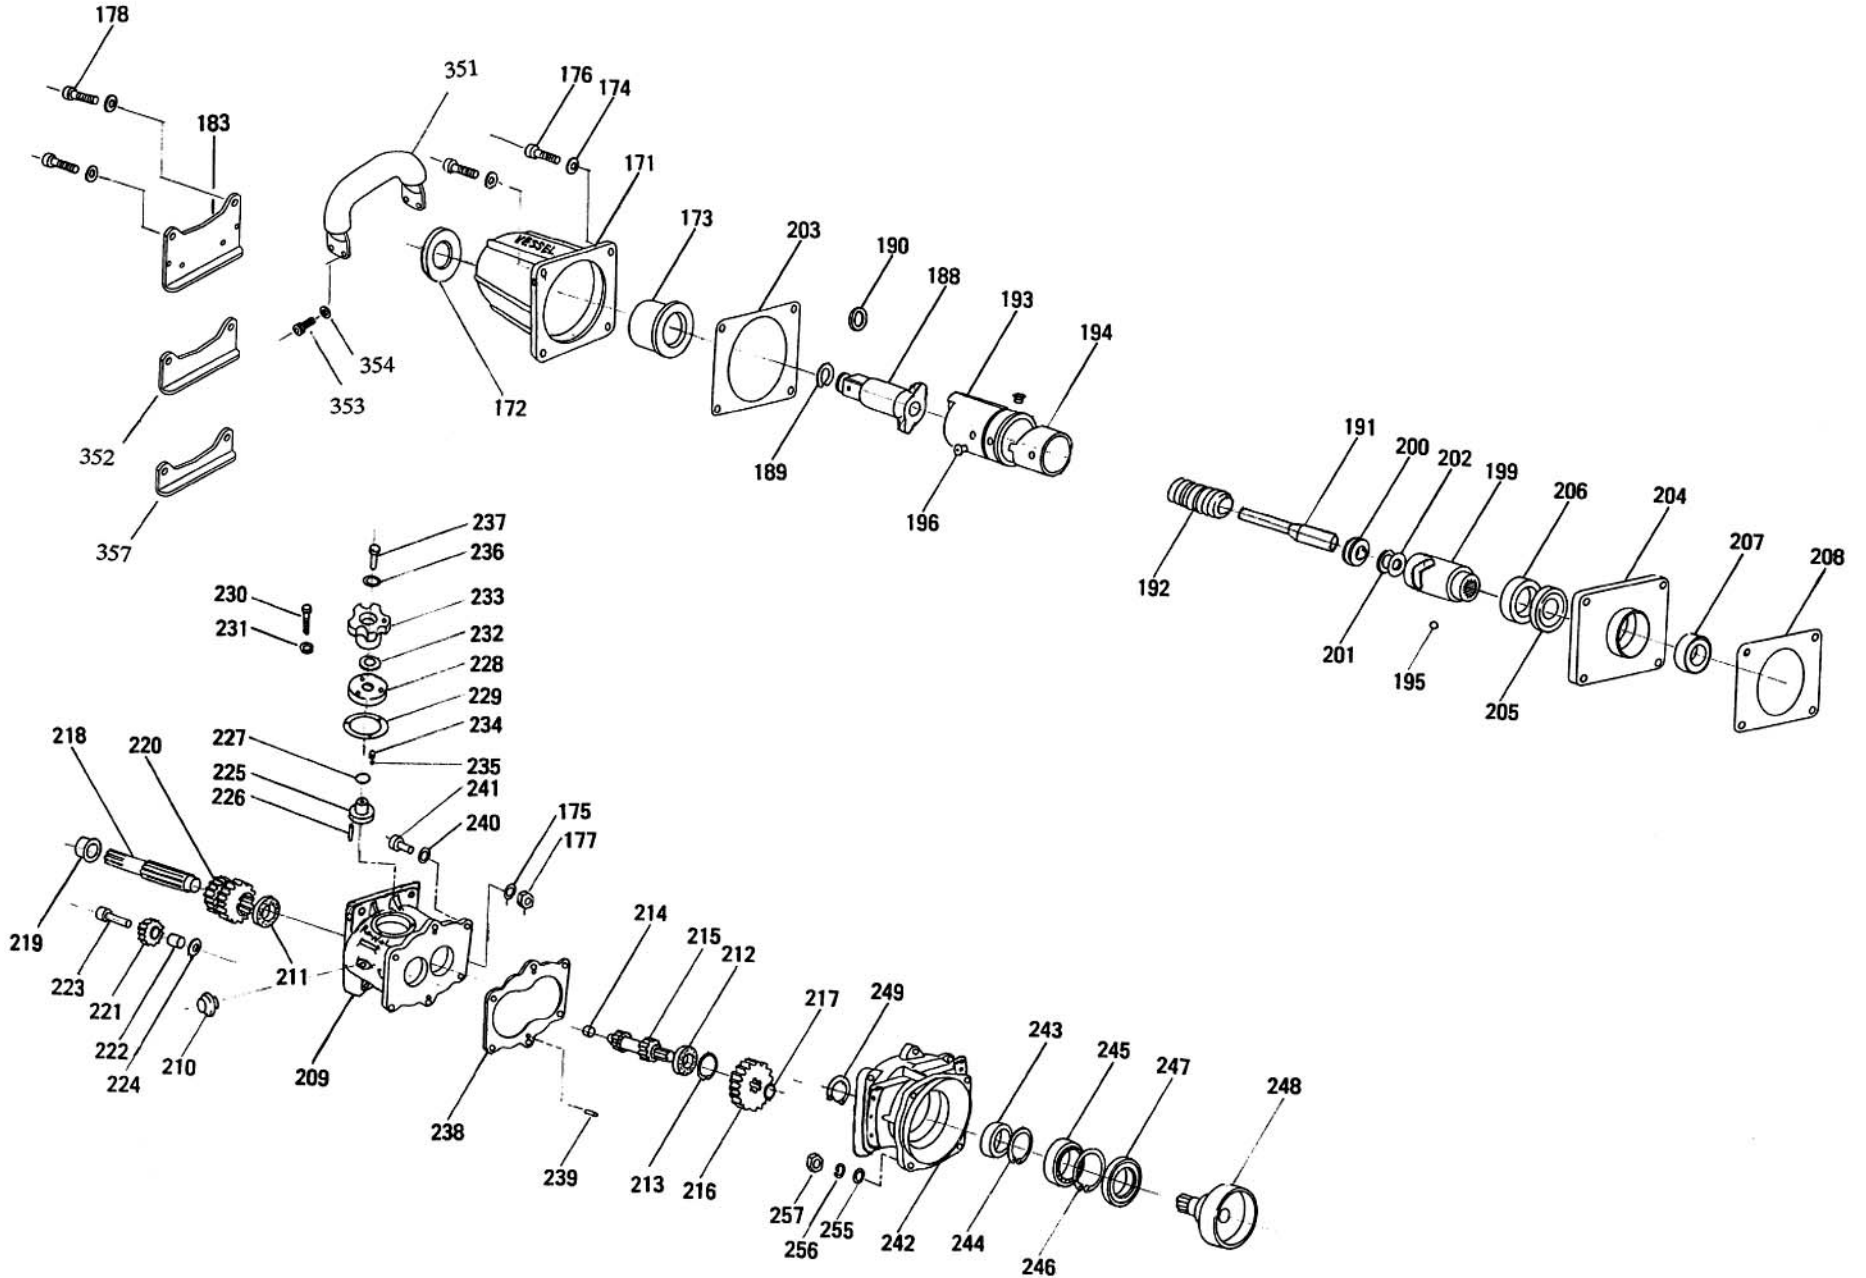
IMPACT MECHANISM-EXPLODED DIAGRAM DRAWING
